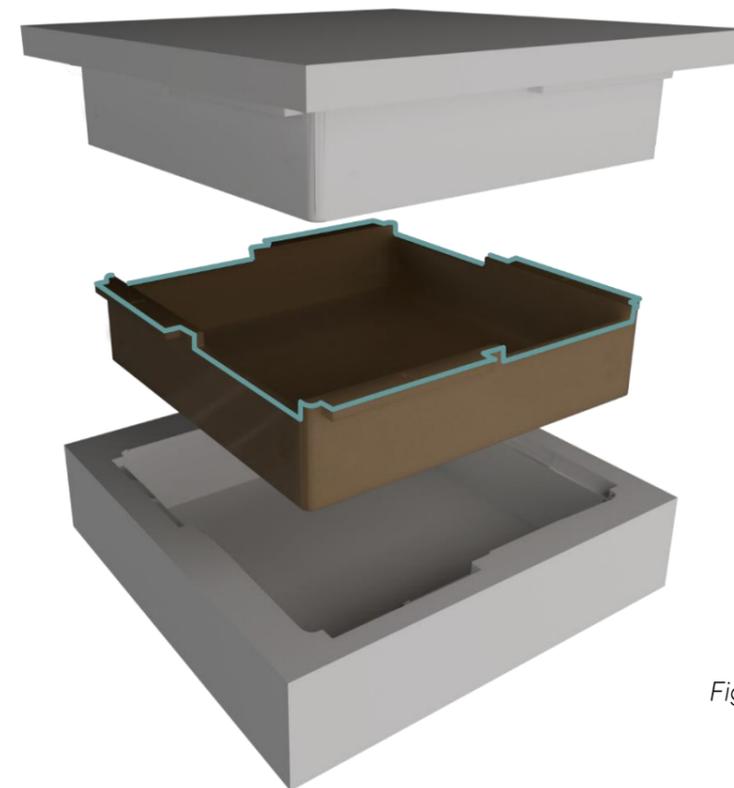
Technical drawing and mould layout (with indicated parting line)
